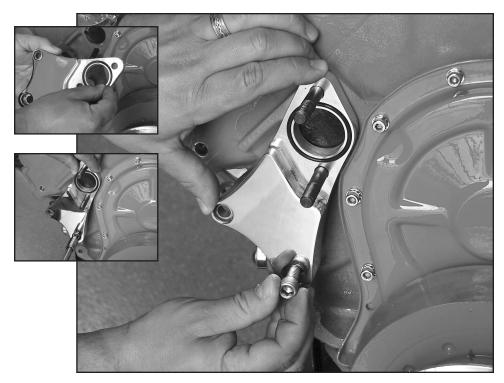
Install O-Rings & Water Pump Spacer Bracket
